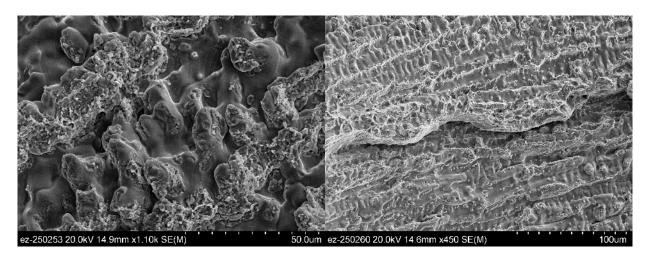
Fracture surfaces of cross-weld tensile specimen (Top 2) from W4 weld.
